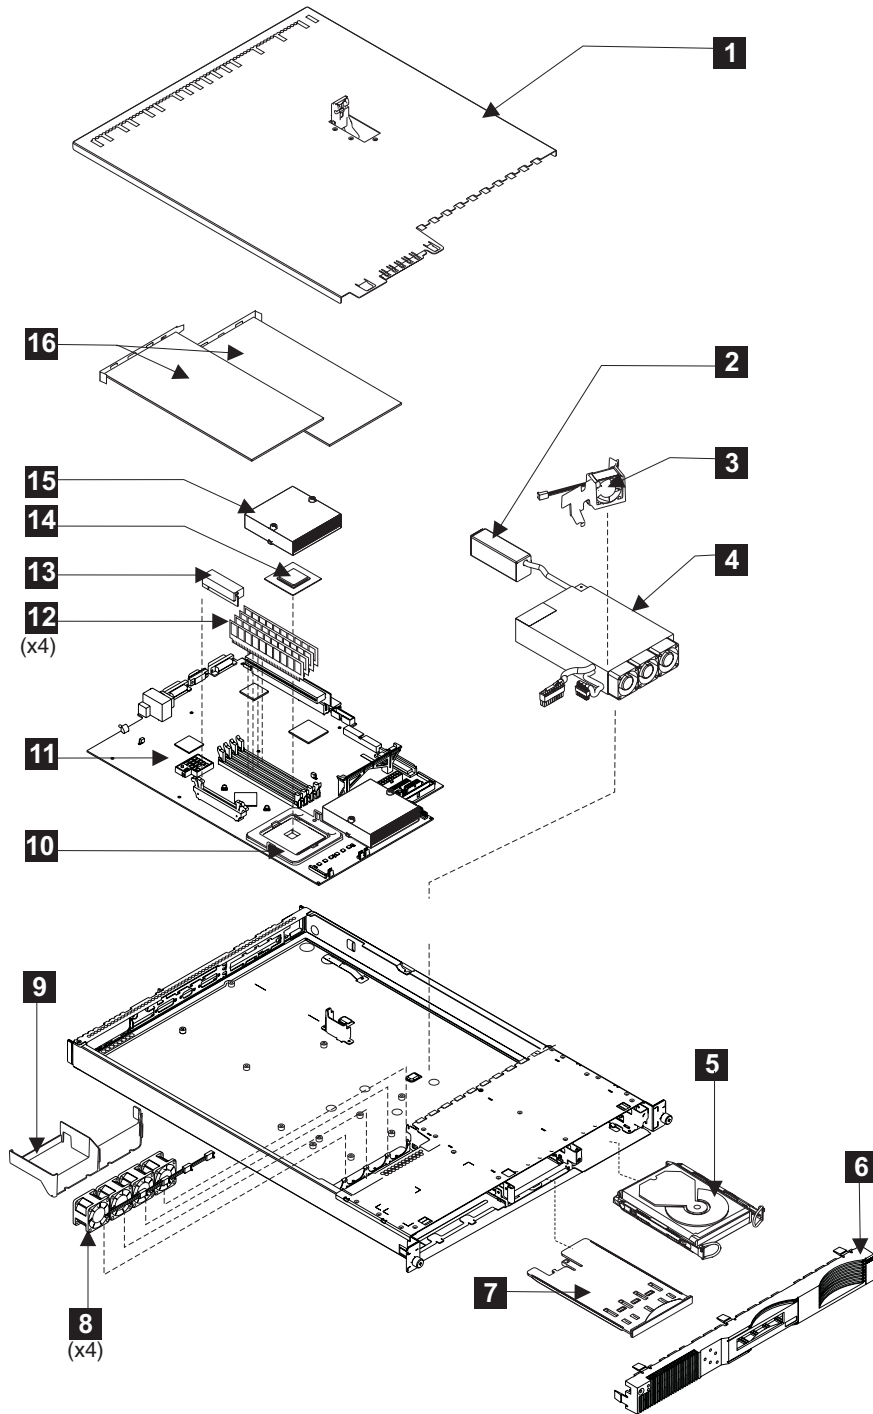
Exploded view of the SAN Volume Controller 2145-4F2 node
